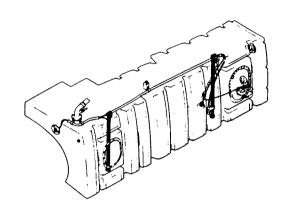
Removal; Forward Fuselage Tank (Sheet 3)
